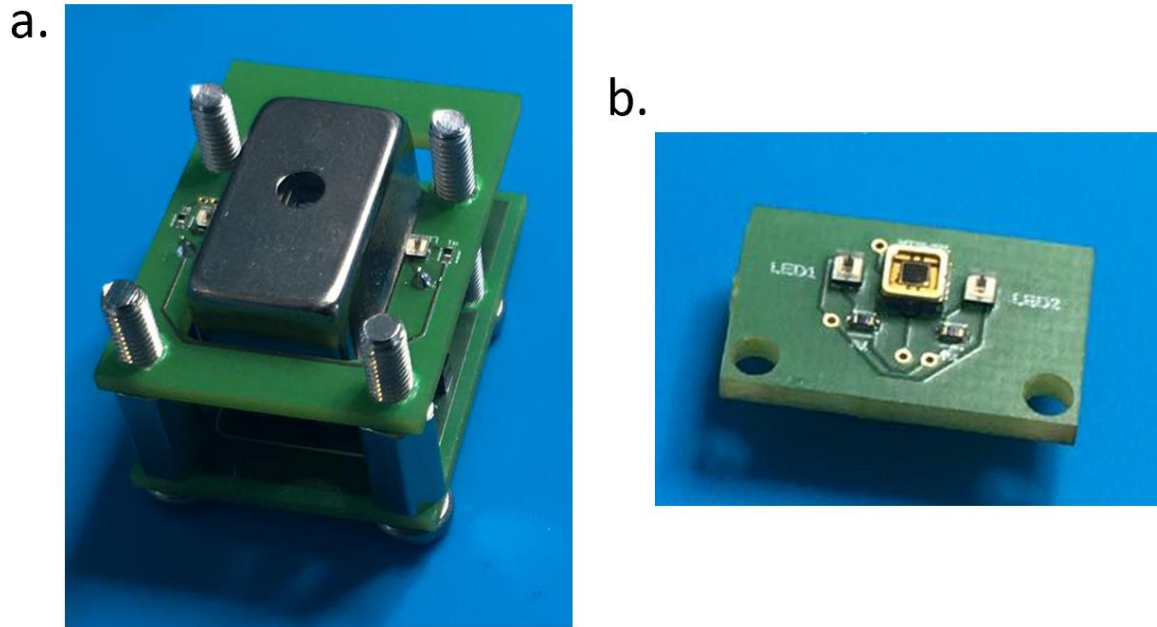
Assembled photodetector printed circuit board boards (a) The stacked spectrometer mounting board and UV LED antifouling board. (b) The photodiode and UV antifouling LED board.
